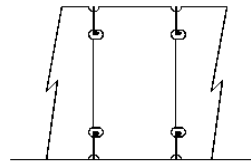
Block assembly methods 3-2e and 3-2f [2], [30]
